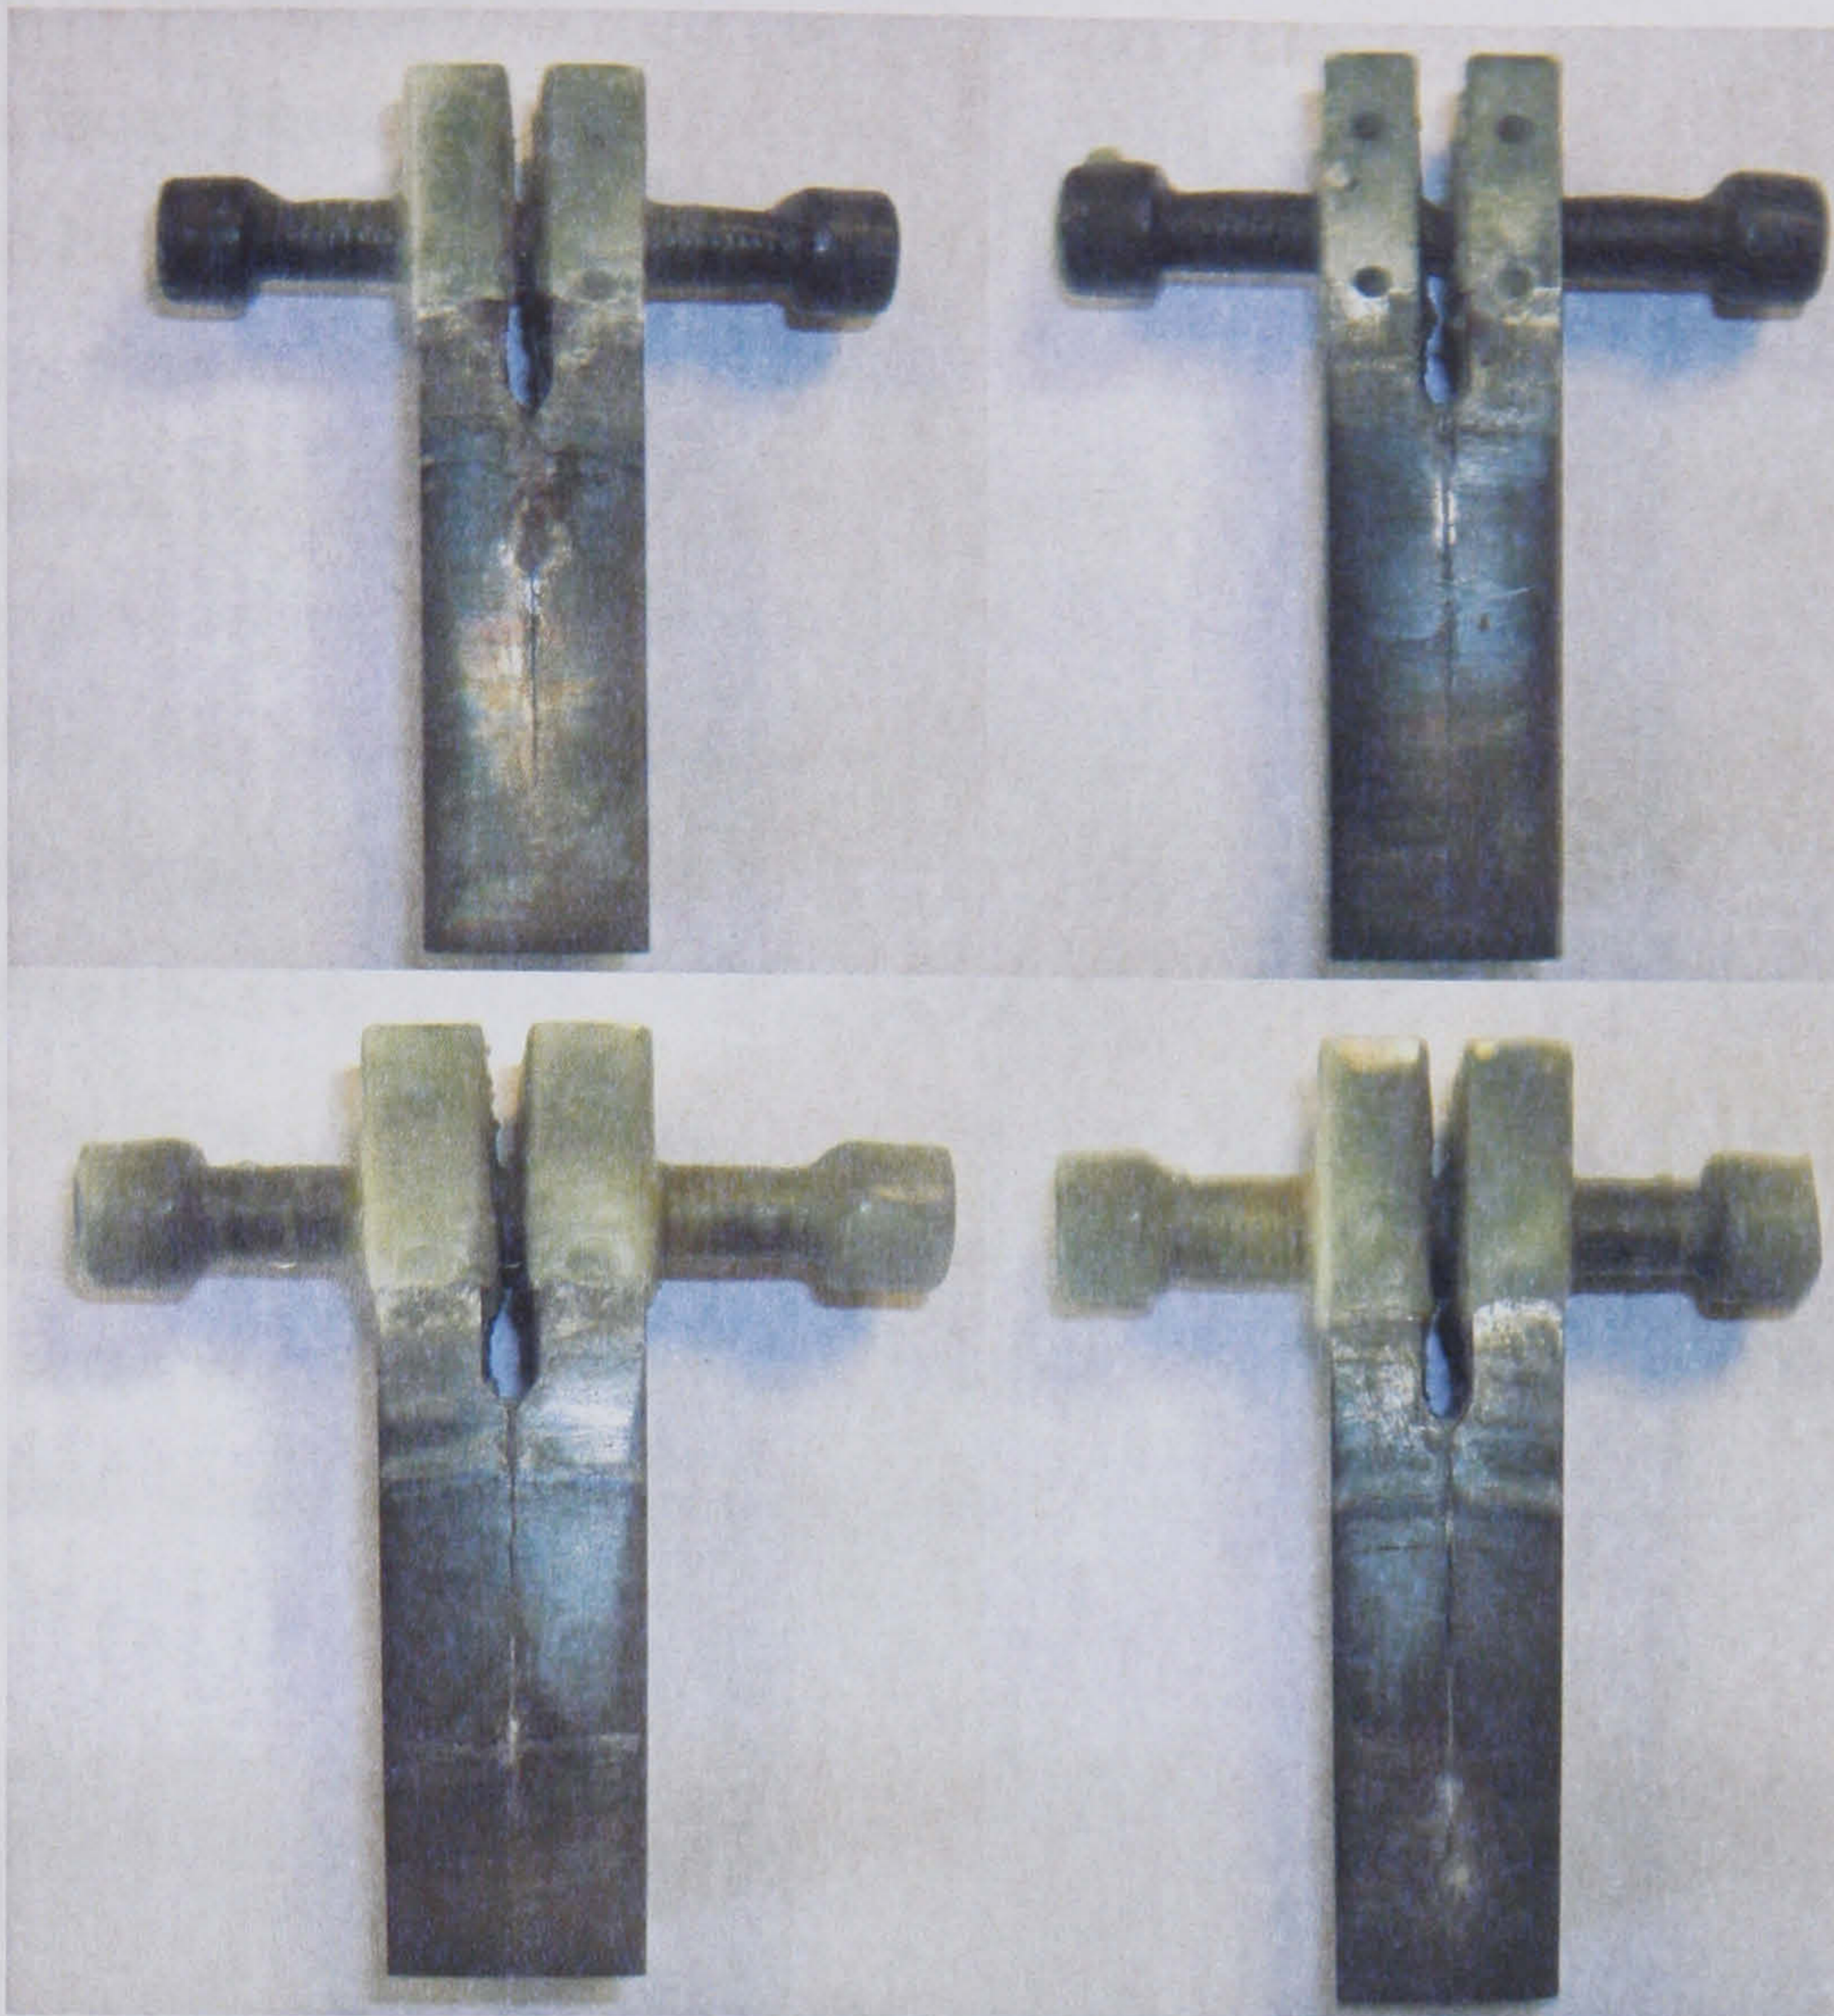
Photographs of DCB specimens showing the stress corrosion cracking under tensile loading.
